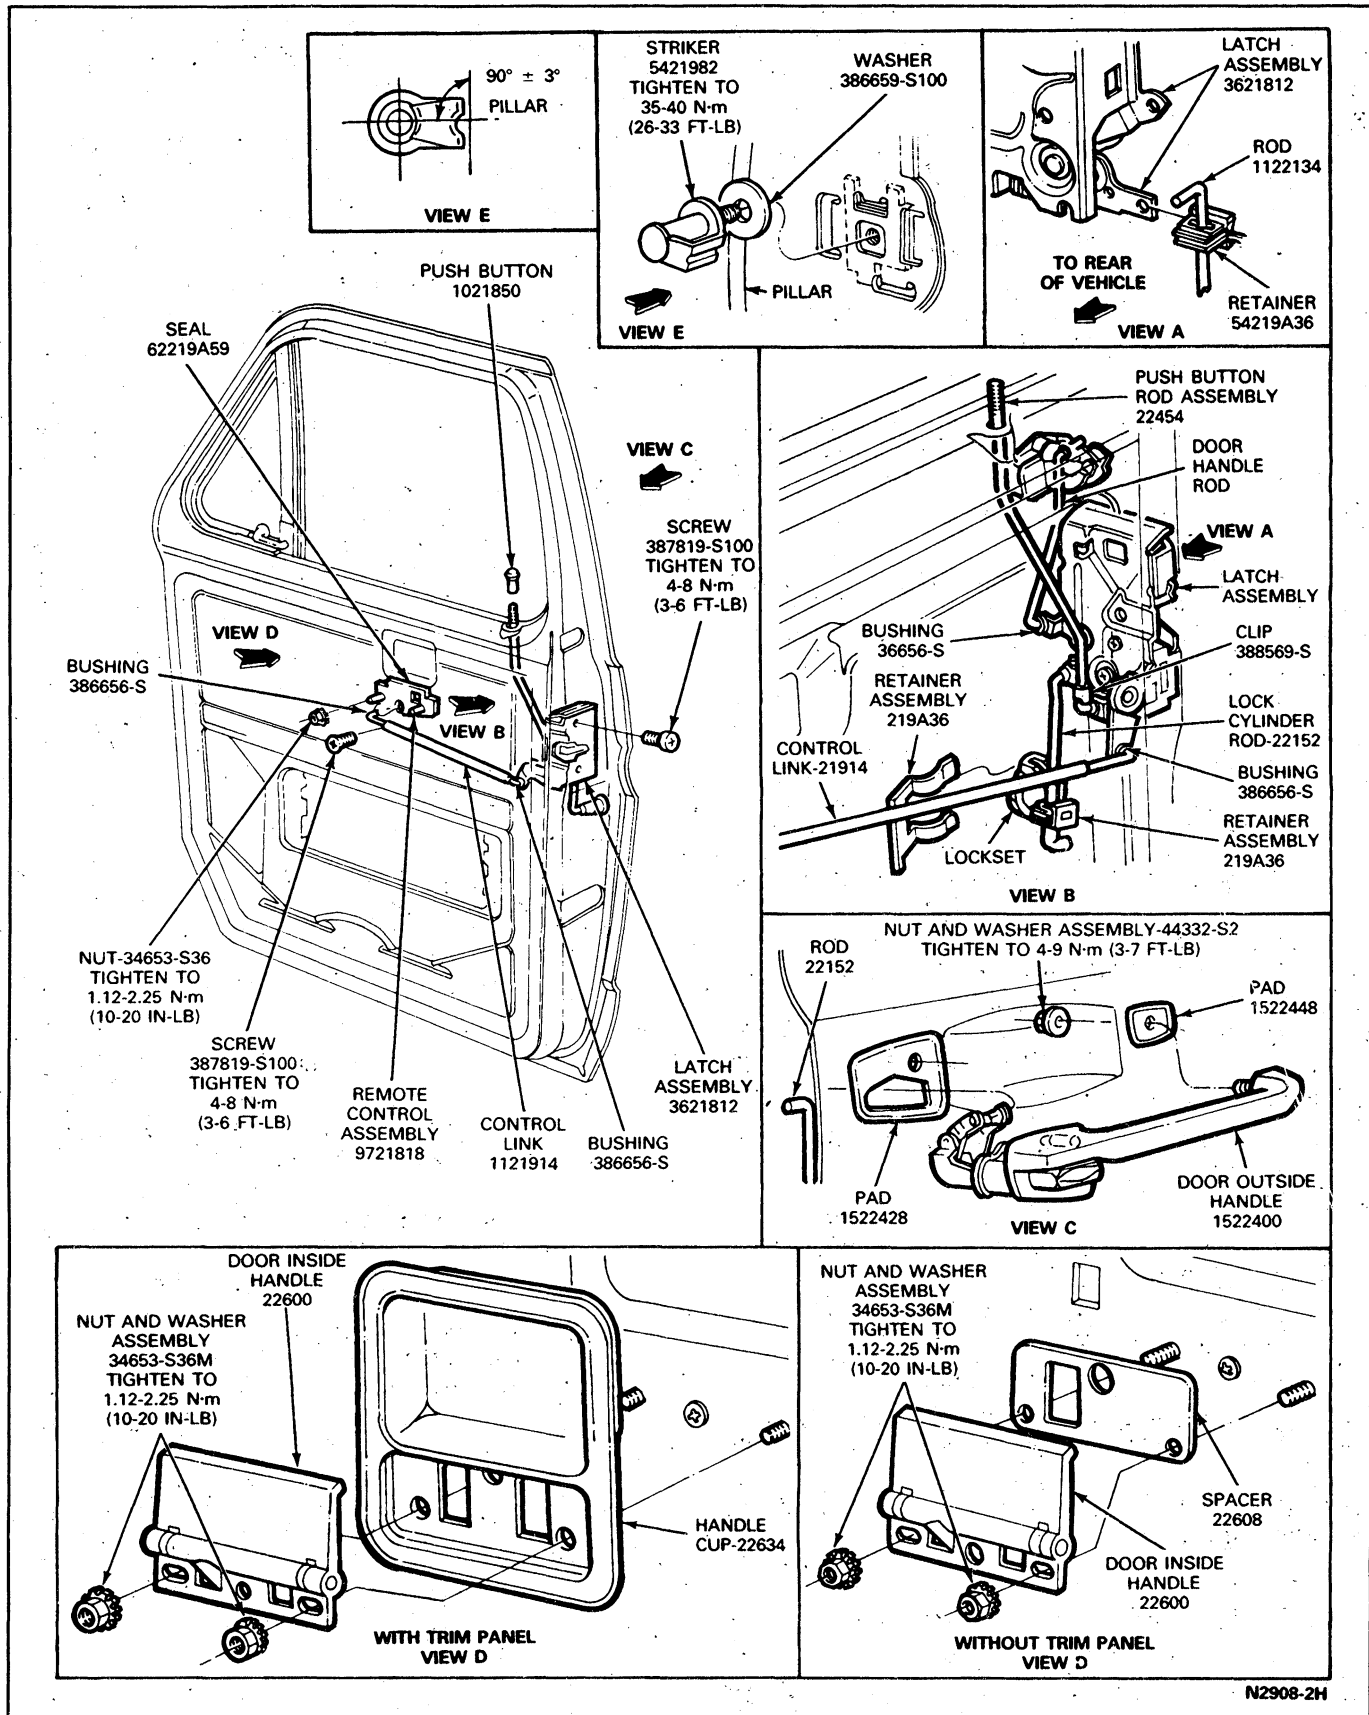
Front Door Latch and Remote Control Installation—E-150—E-350 w/o Power Door Locks
